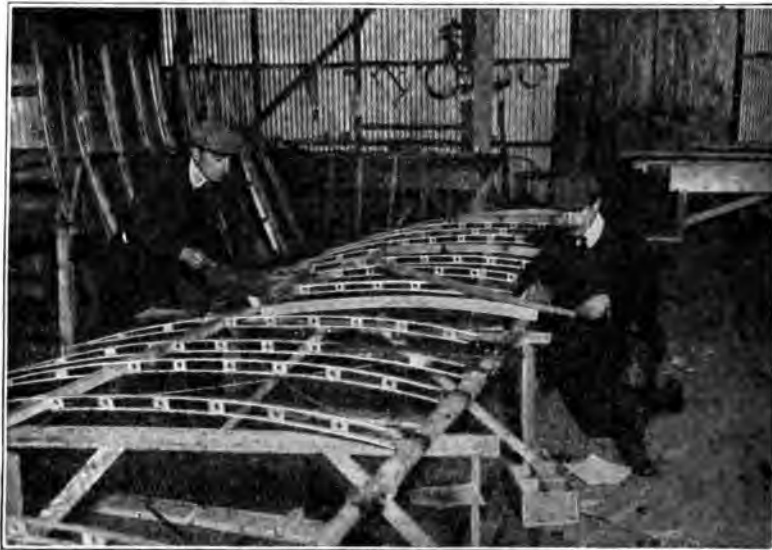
Assembling the Main Planes of a Bleriot Monoplane
